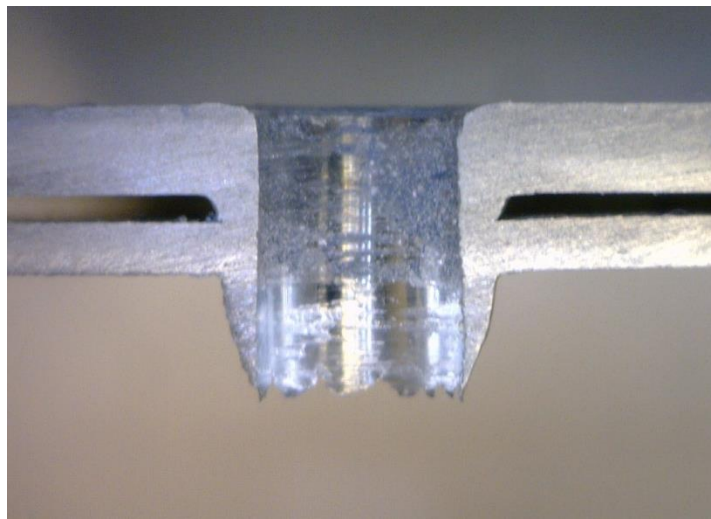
The coalescence of 2.29 mm & 1.25 mm sheet metals in lower die friction drilling at 4000 rpm and 3.81 cm/min using 5.3 mm drill bit.
